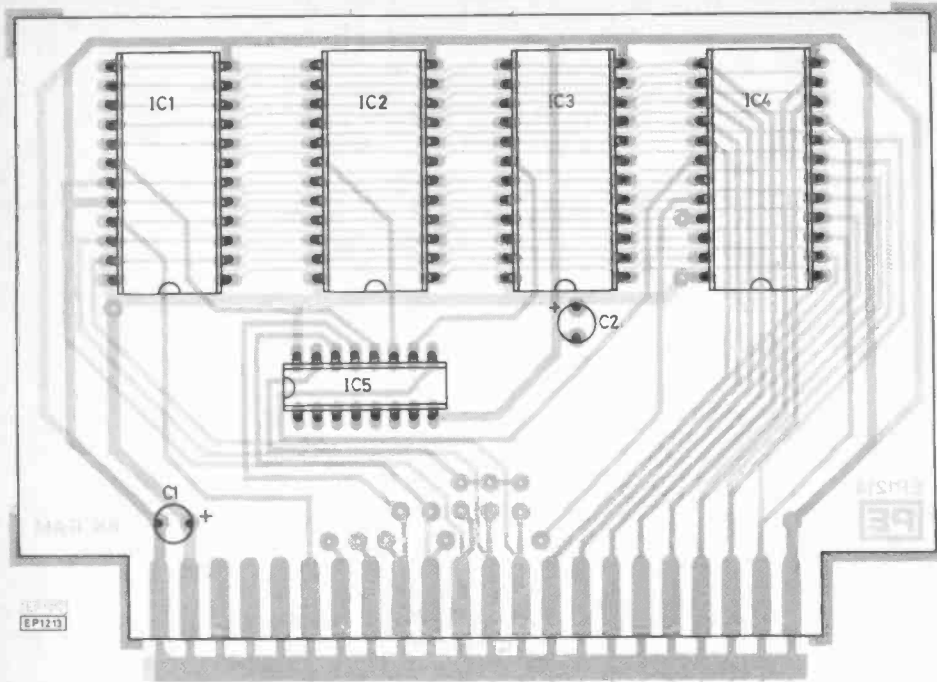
RAM board component layout (actual size). It is suggested that solder-con pins (or RS socket strips) be used as i.c. holders, to simplify component-side soldering. Not all constructors will share the author's skill at soldering near the "underbelly" of plastic i.c. sockets—Ed.
